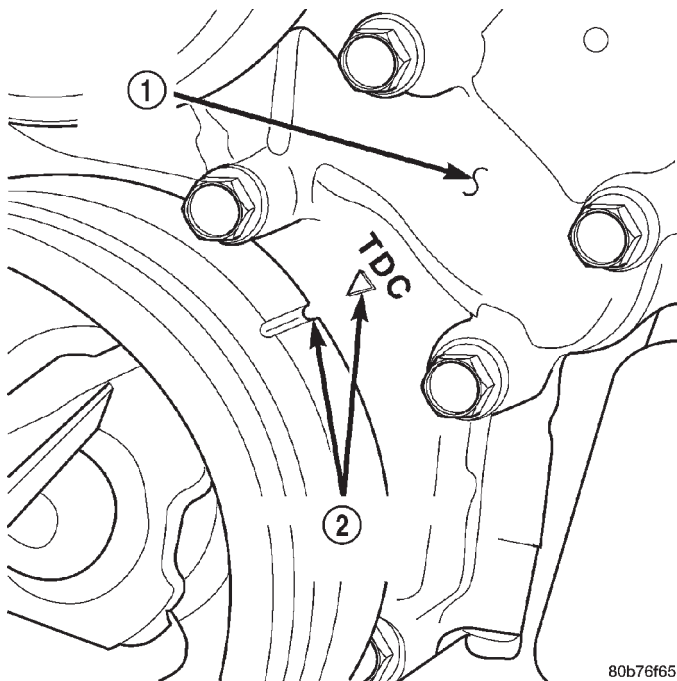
Engine Top Dead Center (TDC) Indicator Mark
